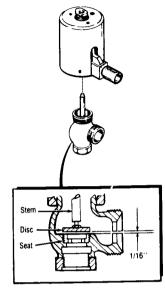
STEAM CONTROL VALVE ADJUSTMENT.
